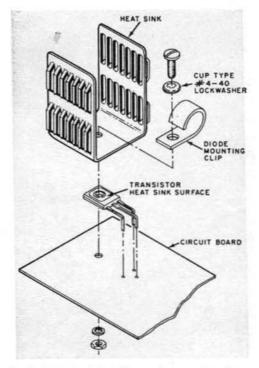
Method of installing each power transistor, heat sink, and diode mounting clamp. The cupshaped lock washer is necessary to prevent cracking the power transistor when it gets hot after long use.
